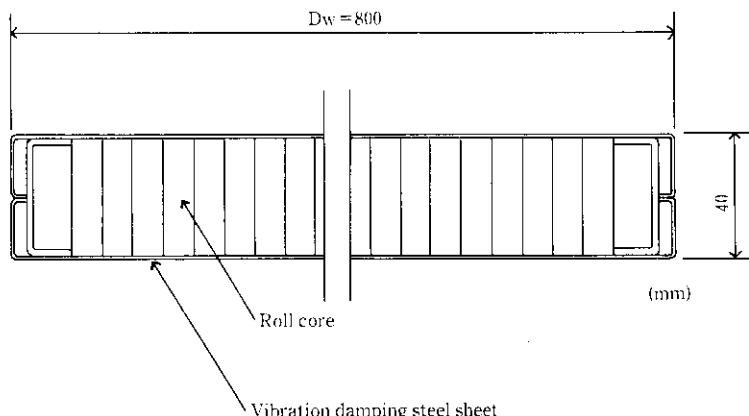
Horizontal cross-section of the newly developed vibration damping steel door
